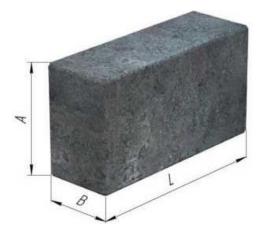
Rectangular section forging: *A*- height, mm; B - width, mm; L - length, mm.
